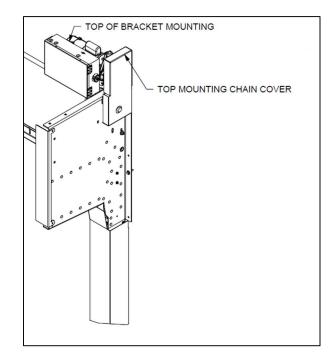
TOP MOUNTING CHAIN COVER OPTION
